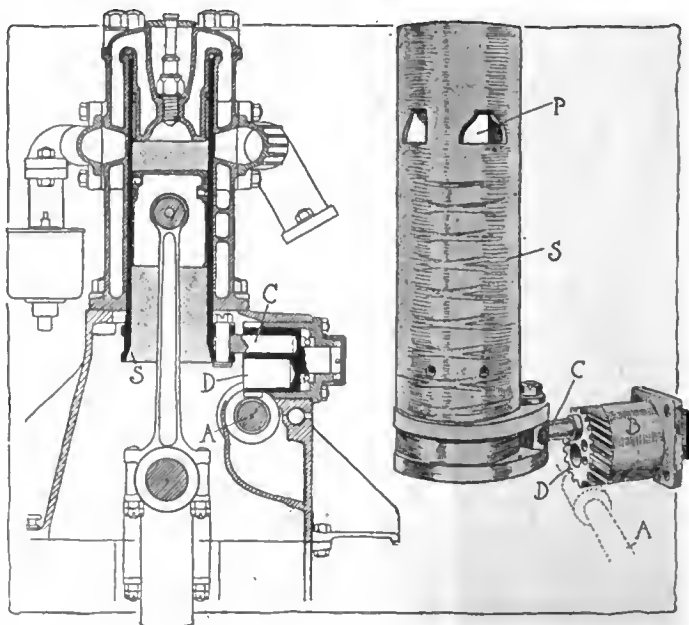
Argyll sleeve motor, showing operation of sleeve valve
